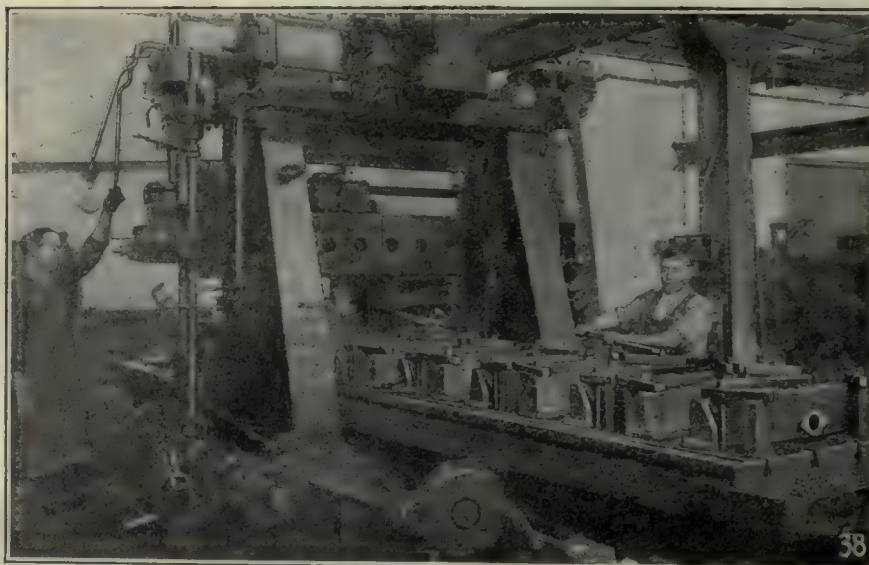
STRING-MILLING RADIATOR HEADER ENDS
